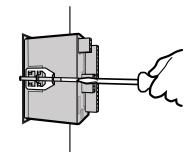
Installing device in a mounting cut-out with ZEM clamps
